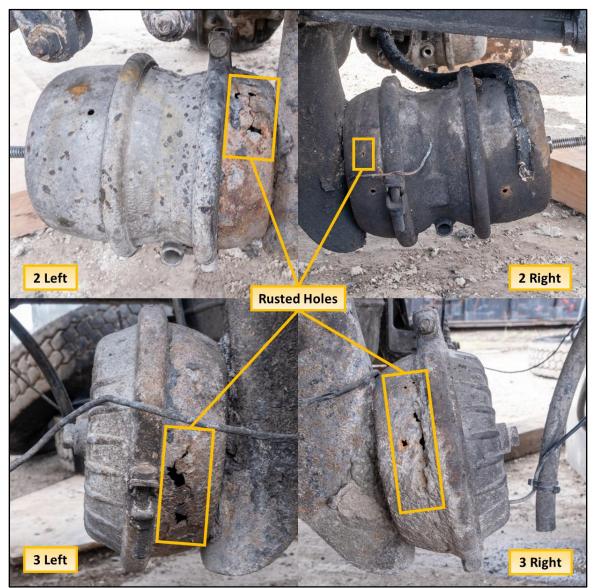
Rusted holes in brake chambers at axle 2 and axle 3.
